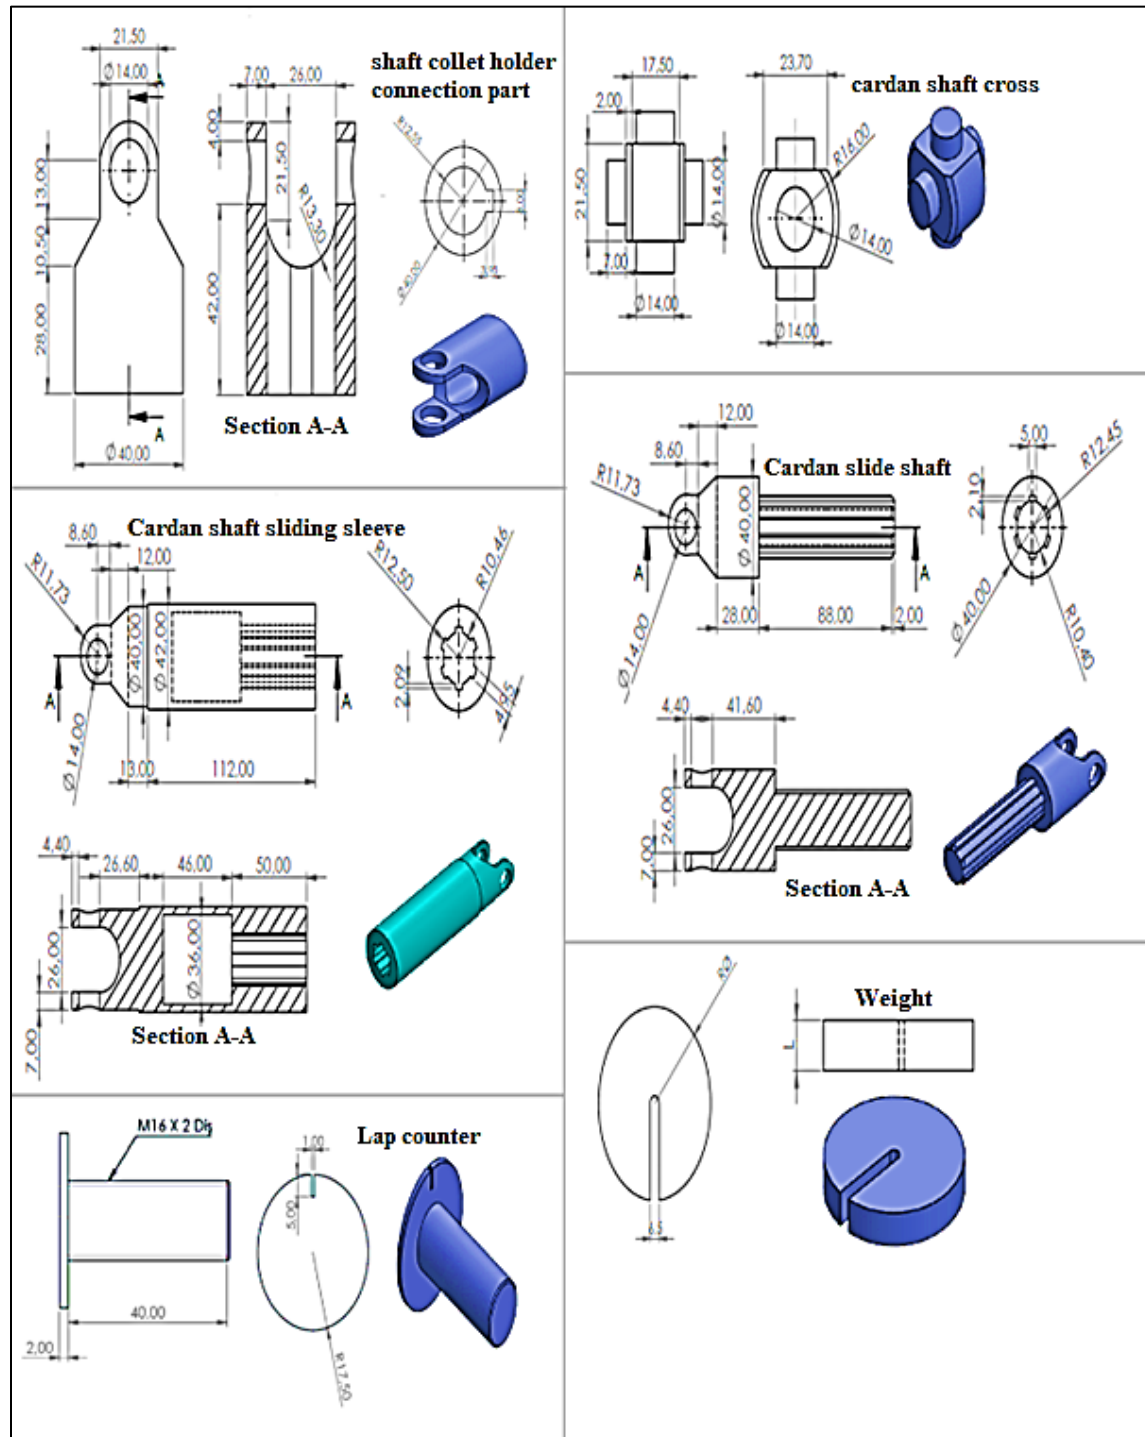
Technical drawing of rotational bending fatigue testing machine equipment (continued)
